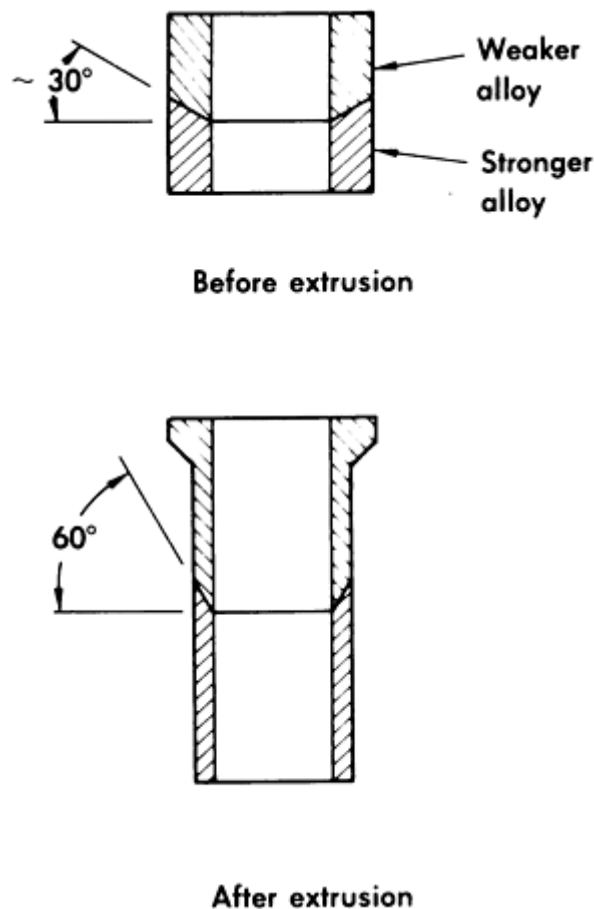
DESIGN FOR BUTT WELDING OF TUBES BY EXTRUSION
